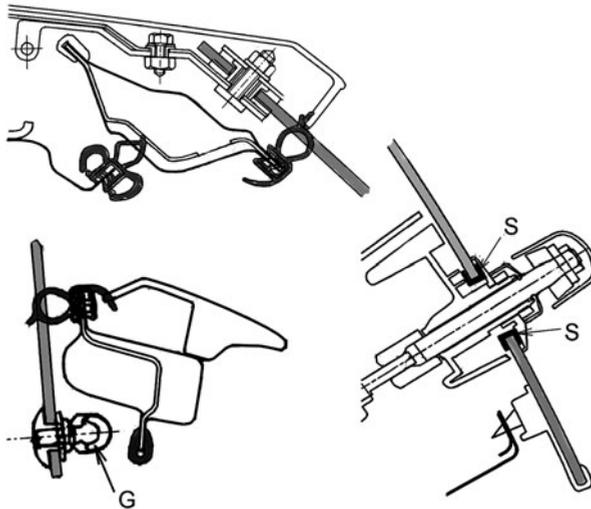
Examples of open back window sections: above, hinge area; G: gas spring fitting; S: gaskets between wiper and glass.
